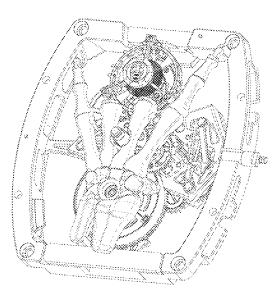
is a perspective view of the front, bottom, and right side of the movement;
